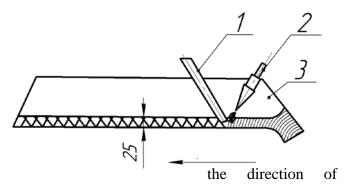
The scheme of welding a share blade with hard alloy with the help of a gas burner: 1 - a bar of hard metal; 2 - flare; 3 - share
